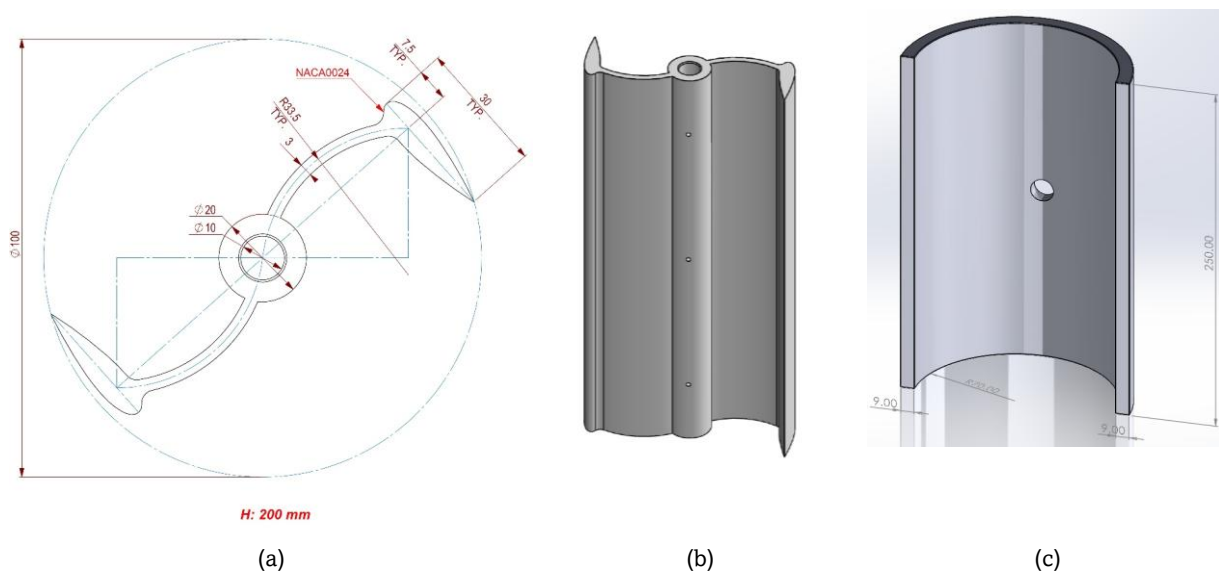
SolidWorks design of the aerofoil-assisted SVAWT: (a) top-view engineering drawing (rotor $\varnothing 100$ mm, blade radius R33.5 mm, NACA0024 aerofoil tip chord 30 mm, height $H = 200$ mm); (b) isometric view of the 3D-printed two-bladed rotor; (c) half-cylinder aerodynamic augmentation shell (height 250 mm, inner diameter 120 mm, edge gap 9 mm).
